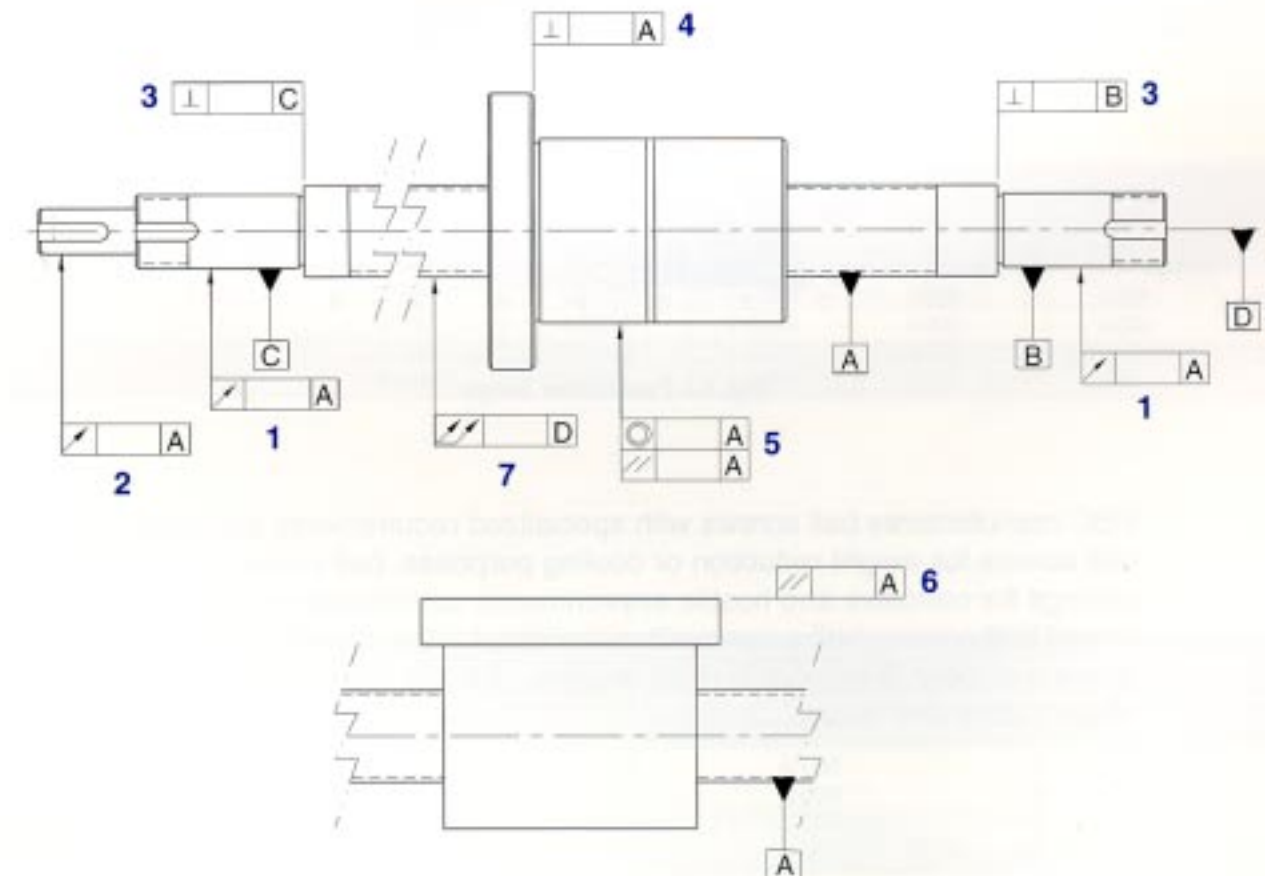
Mounting Accuracy and Tolerances
